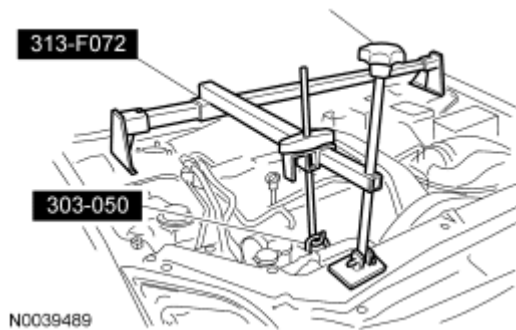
Lifting Engine Using Special Tool (303-050, 313-F072)
